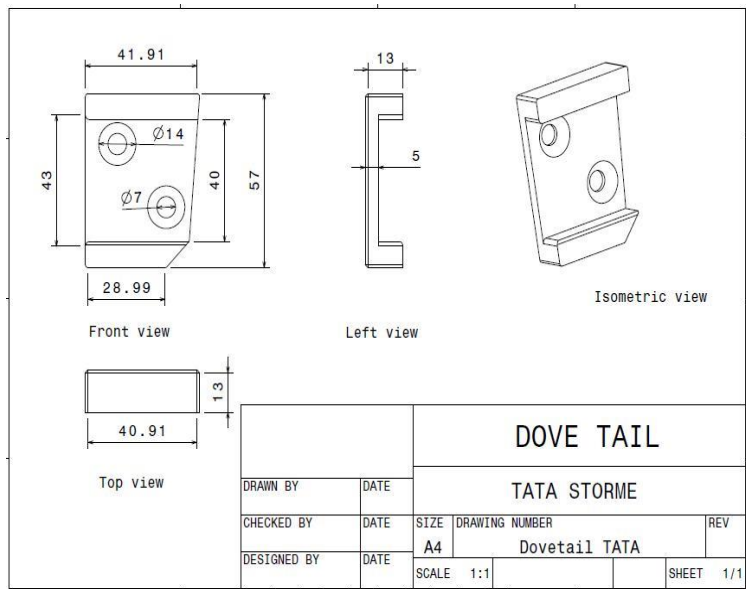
Catia Drawing of Dovetail [Automobile Part]
